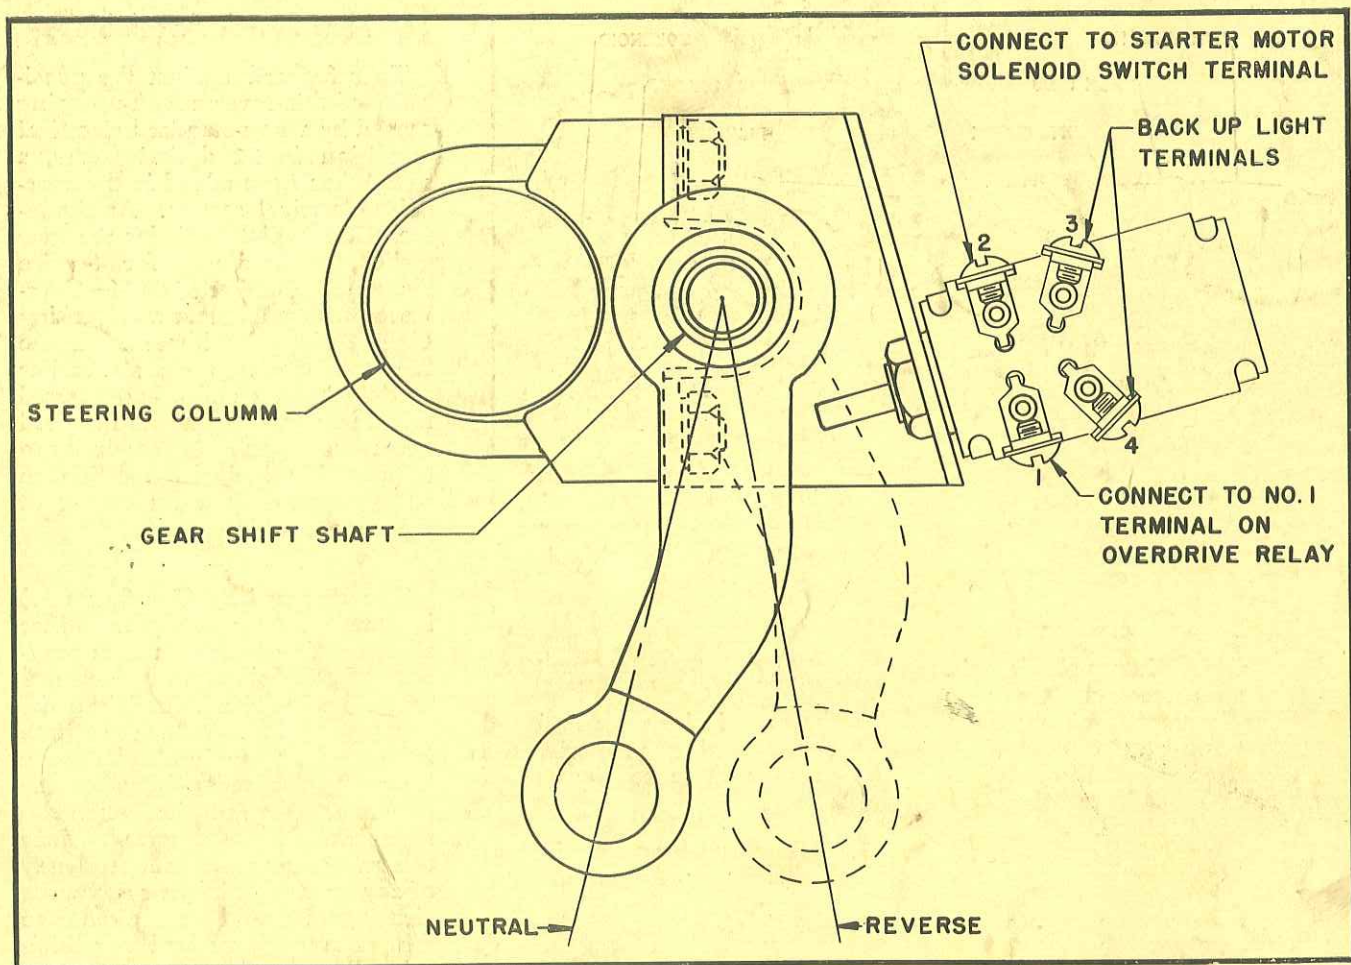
Schematic Drawing of New Overdrive, Reverse Lockout and Backing Light Equipment
